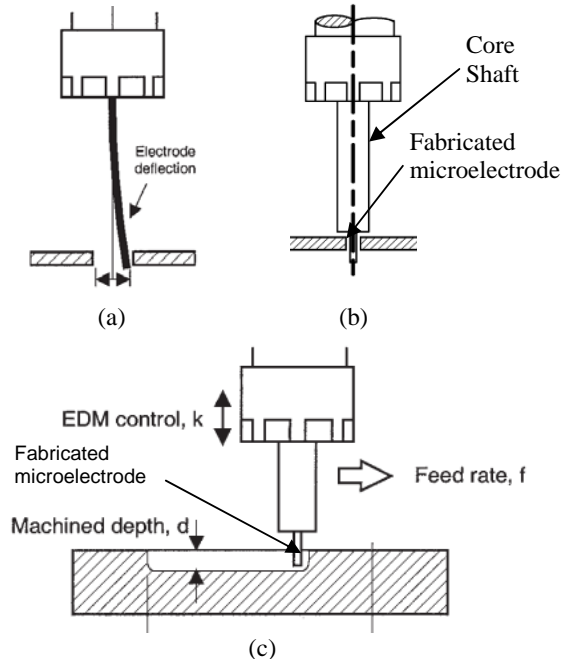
(a) Machining with longer electrodes introduces deflection due to low stiffness, (b) Micro-EDM drilling with on-machine fabricated microelectrode, (c) micromold fabrication using on-machine fabricated microelectrode.
